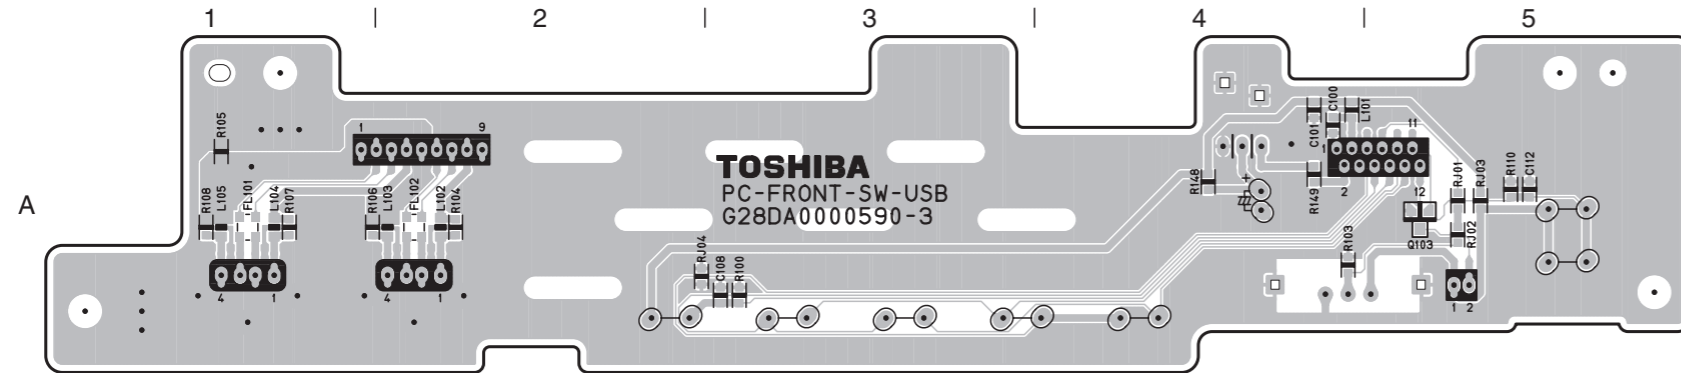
Front Switch/USB PC Board (Bottom side)
